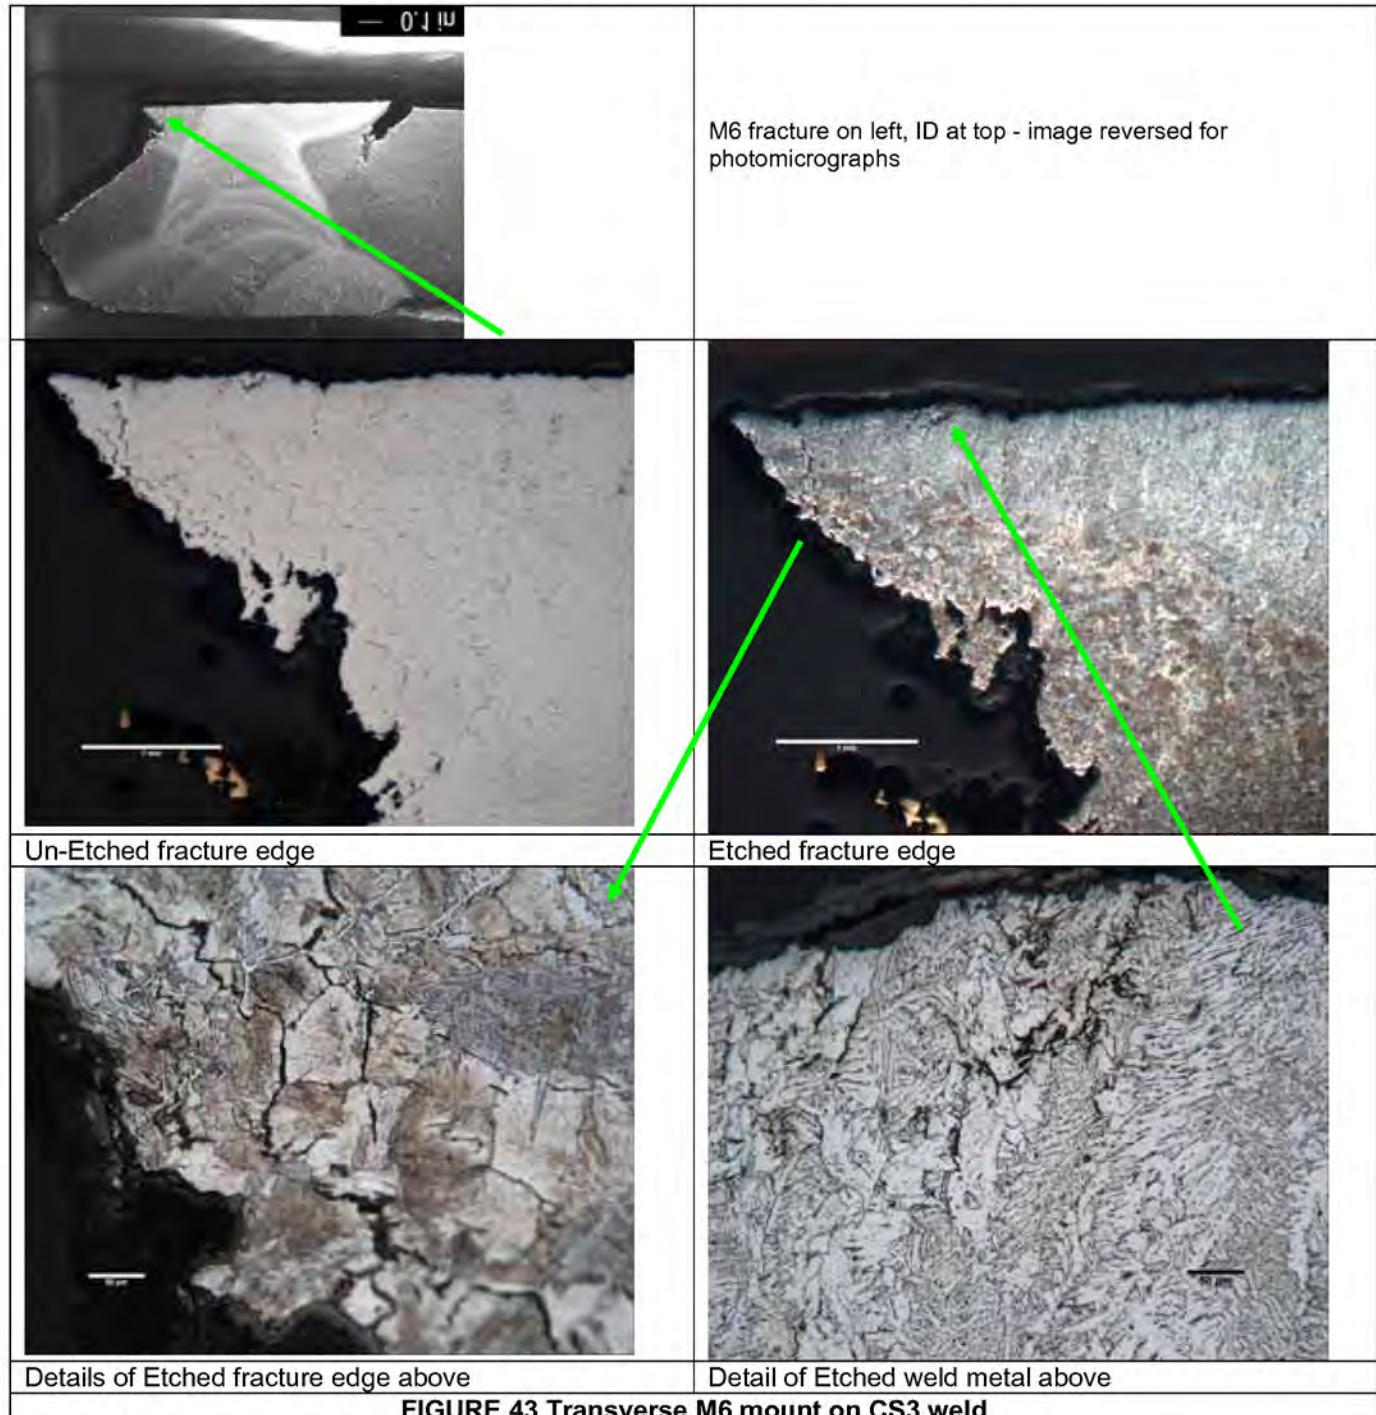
Transverse M6 mount on CS3 weld
